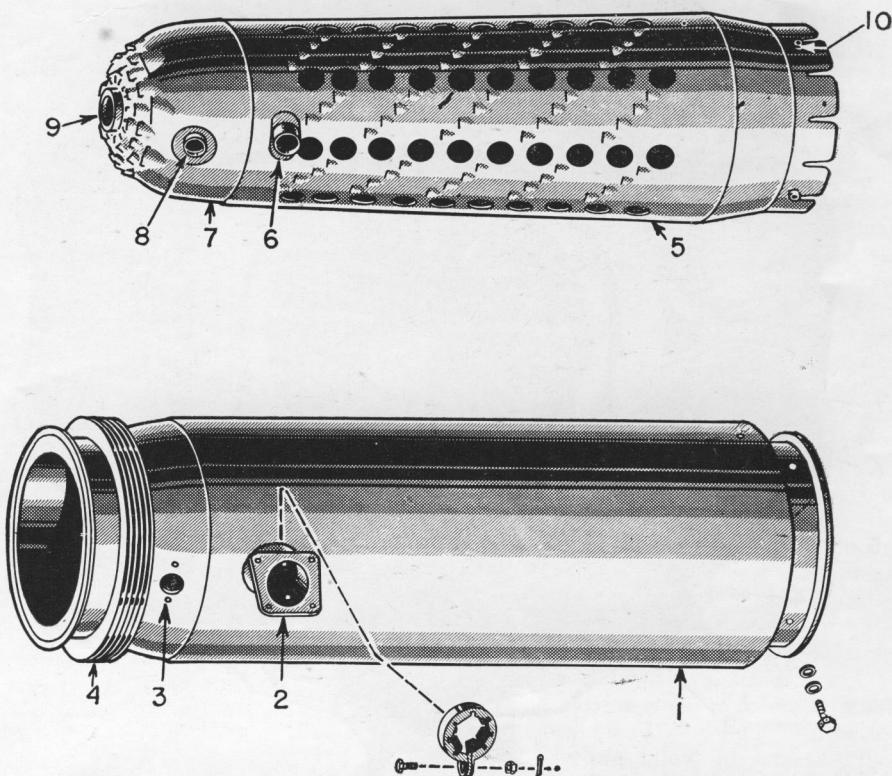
TG-180 combustion chamber drawing showing typical construction details: (1) outer chamber; (2) outer cross-ignition tube assembly; (3) ignitor plug flange; (4) expansion bellows, internal on most models; (5) combustion liner; (6) ferrule for cross-ignition tube; (7) liner dome; (8) ignitor plug ferrule; (9) fuel nozzle ferrule; (10) liner support boss.
